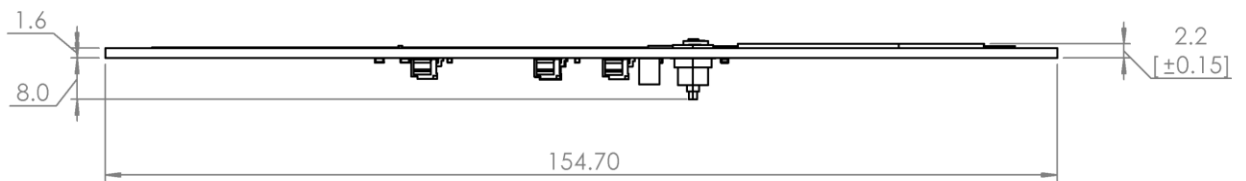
1.5U Solar Panel X/Y RBF - Side View
